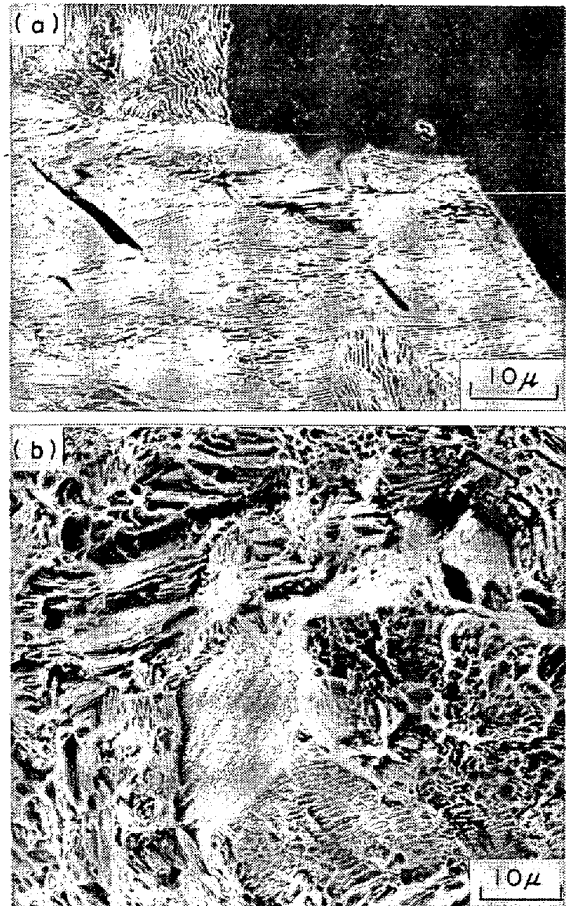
(a) : Voids in the region immediately underneath of fracture surface and (b) : fracture surface. Steel F.
